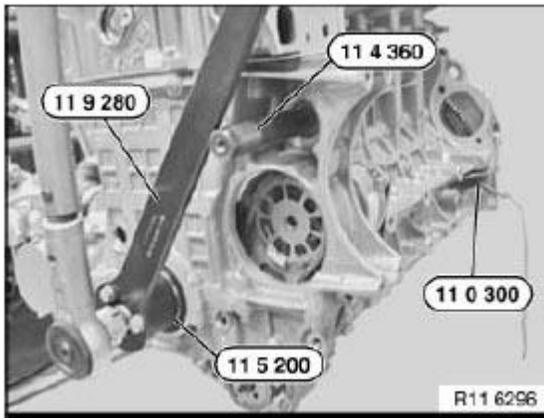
Identifying Special Tool (11 9 280, 11 4 360, 11 5 200 And 11 0 300)
